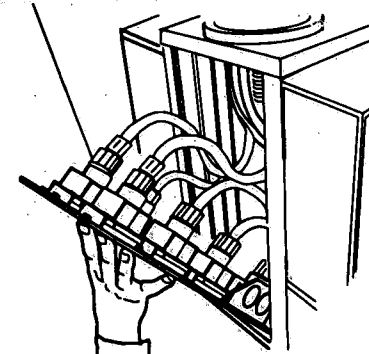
Guide Lines into Support Head Assembly Cavity
